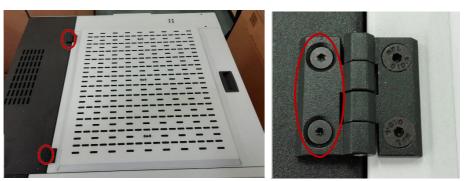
Tightening the DIN7991-M5x12 screws fixing the top cover to the printer
